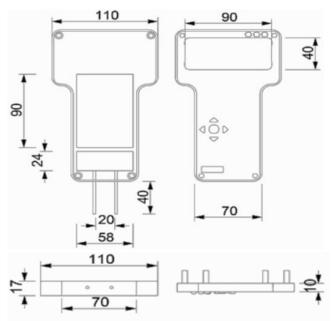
The technical drawings of the first prototype In order to make a test first of all the sample of interest should be selected from the menu. As a second step electrodes should be cleaned and stabbed to sample. After stabbing, by pressing the start button measurement should be started. Measurement takes about 20 seconds for each sample and after that, a message appears in the LC display which indicated the freshness stage of the sample also according to the interval which measured value belongs one of the colored LEDs starts to light to simplify the understanding of the result. Also after each measurement, a beep tone is heard to show measurement is completed. To make a new measurement by using direction and selection keys the measure again button should be selected. Then the software leads us back to the menu of samples to select the sample type for next measurement [20].
